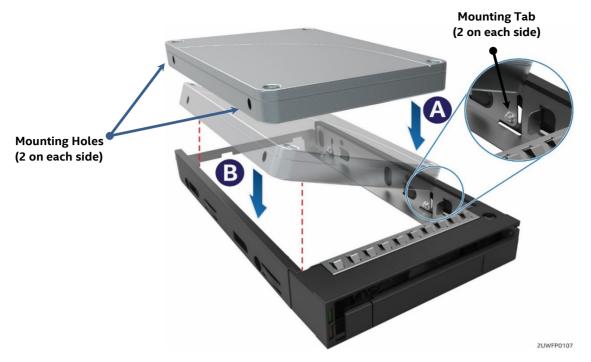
2.5" Drive Carrier Assembly - Drive Installation to Carrier
